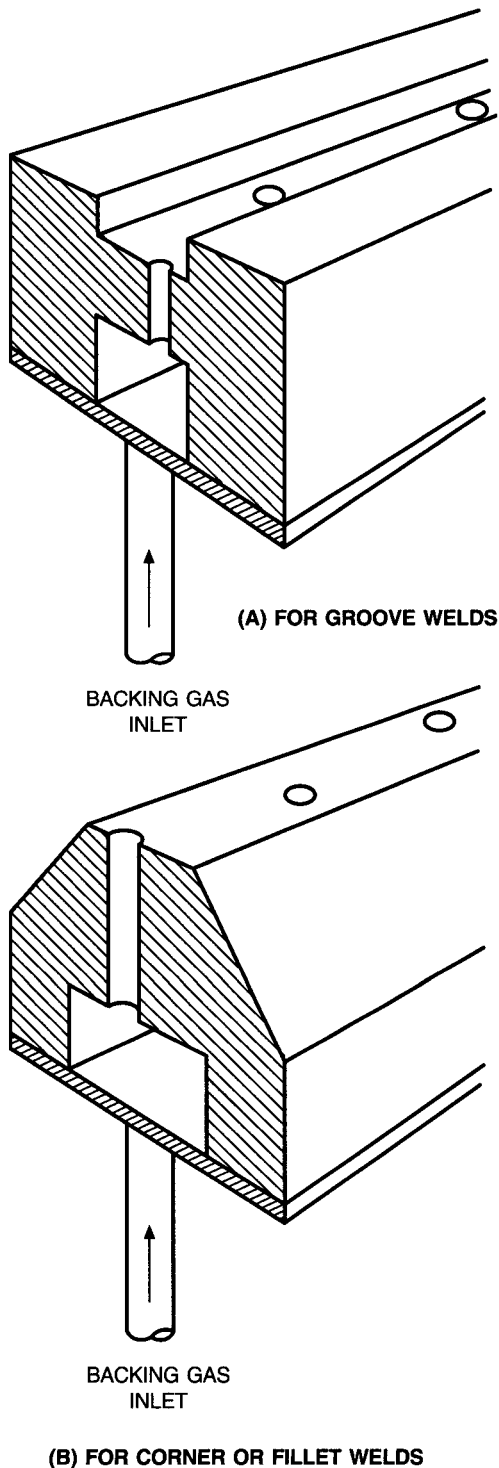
Weld Backing Bars that Provide Inert Gas Shielding
